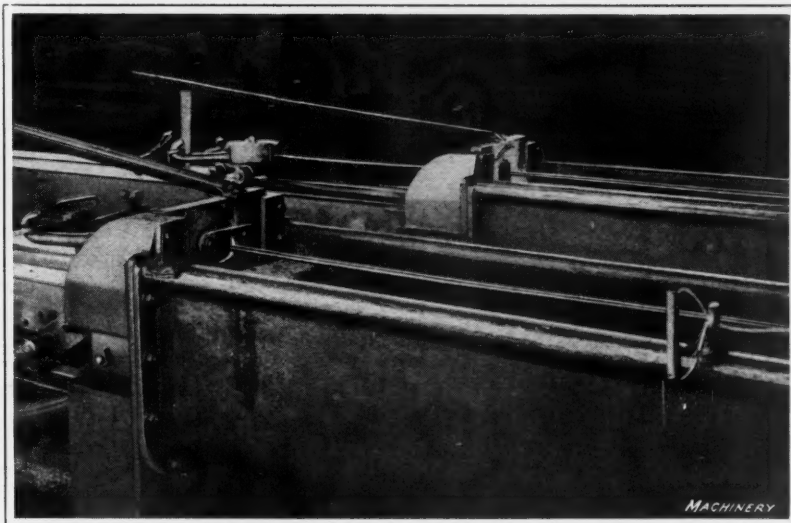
Close-up View of Dies on Two of the Draw-benches. The Die governs the Outside Diameter of the Tube; and the Inside Diameter is held Constant by a Sizing Mandrel
